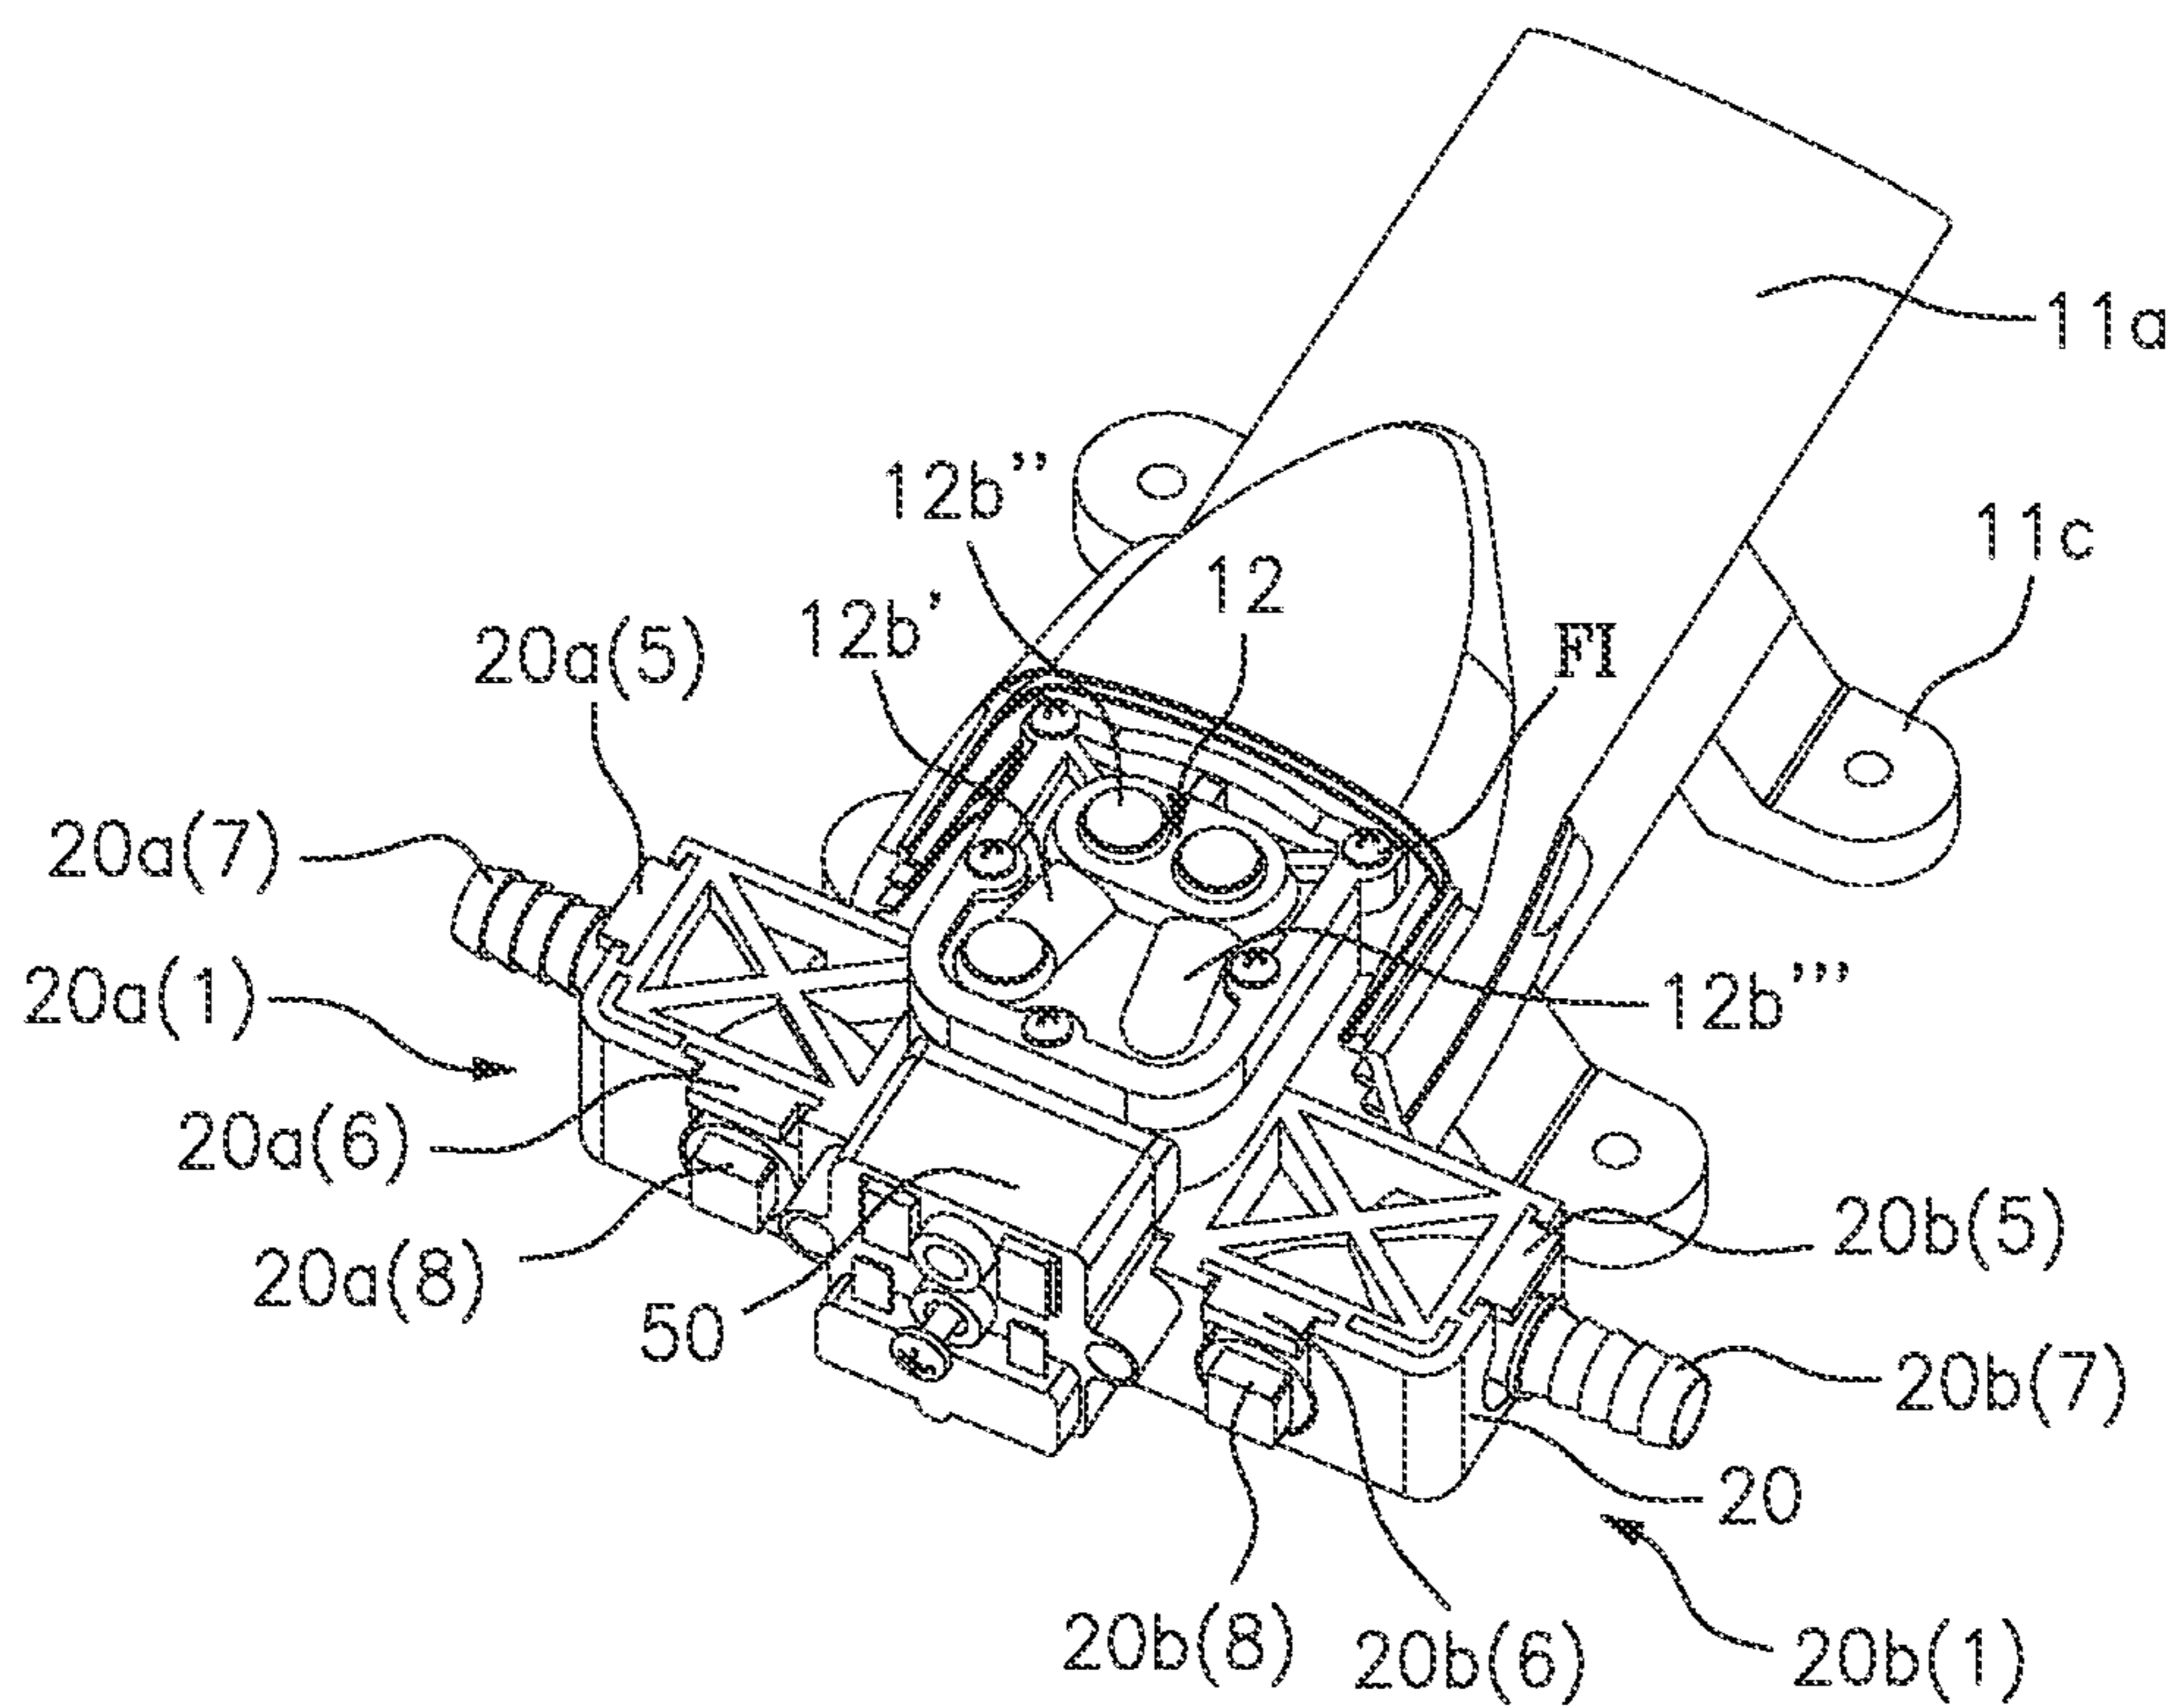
A: Pump Assembly showing standard port fitting connection left/right
